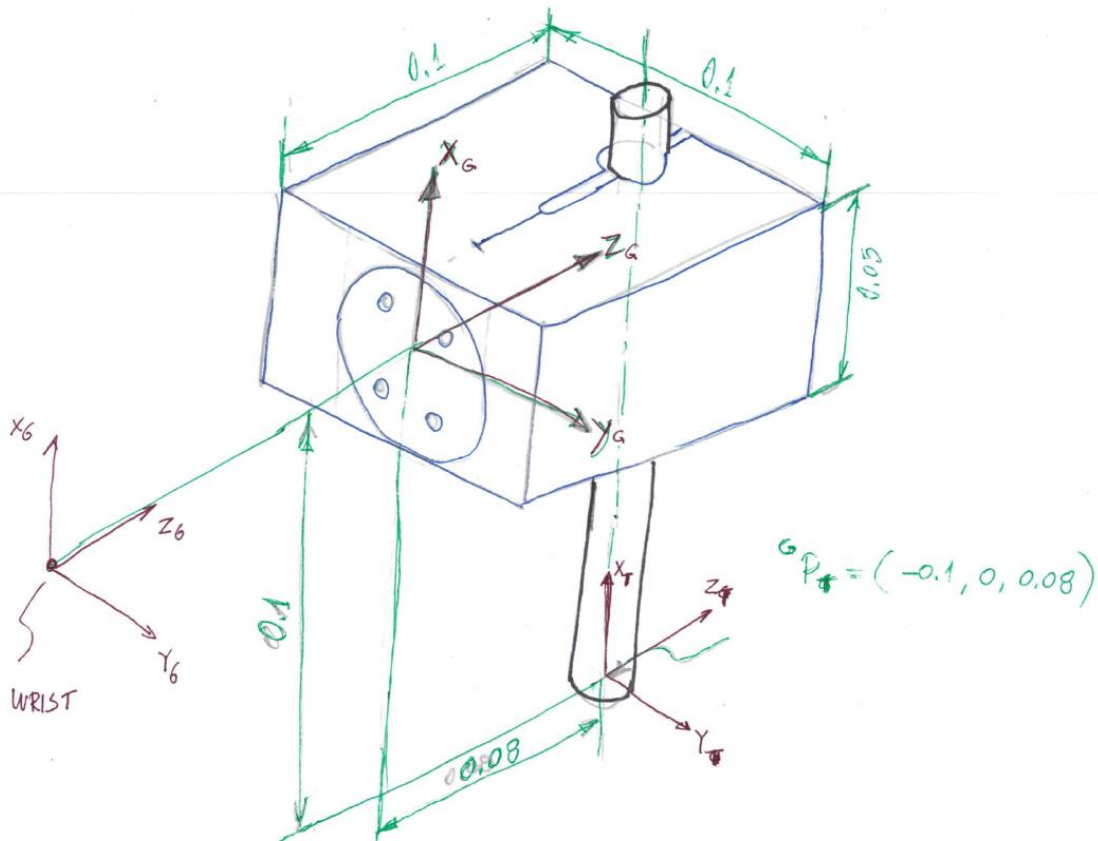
End Effector (gripper) Holding a plasma cutting tool.
